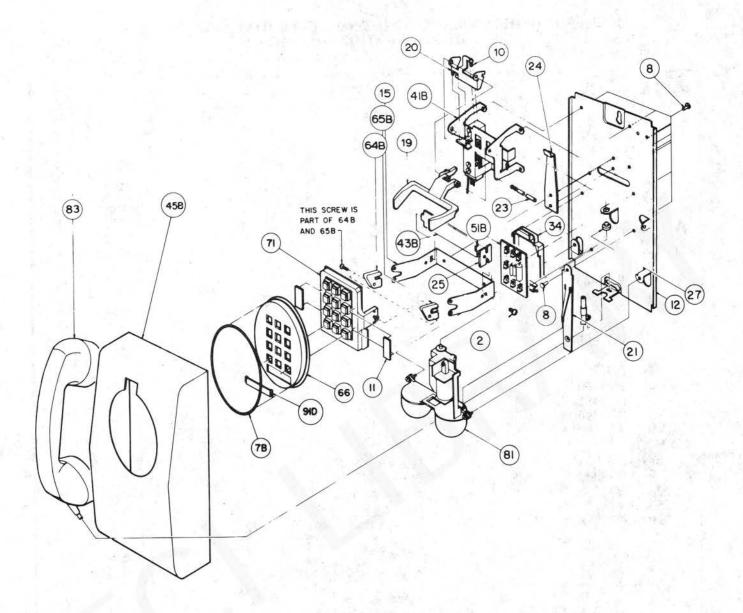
Exploded View of QSK2554A and QSKE2554B-Type Telephone Sets
